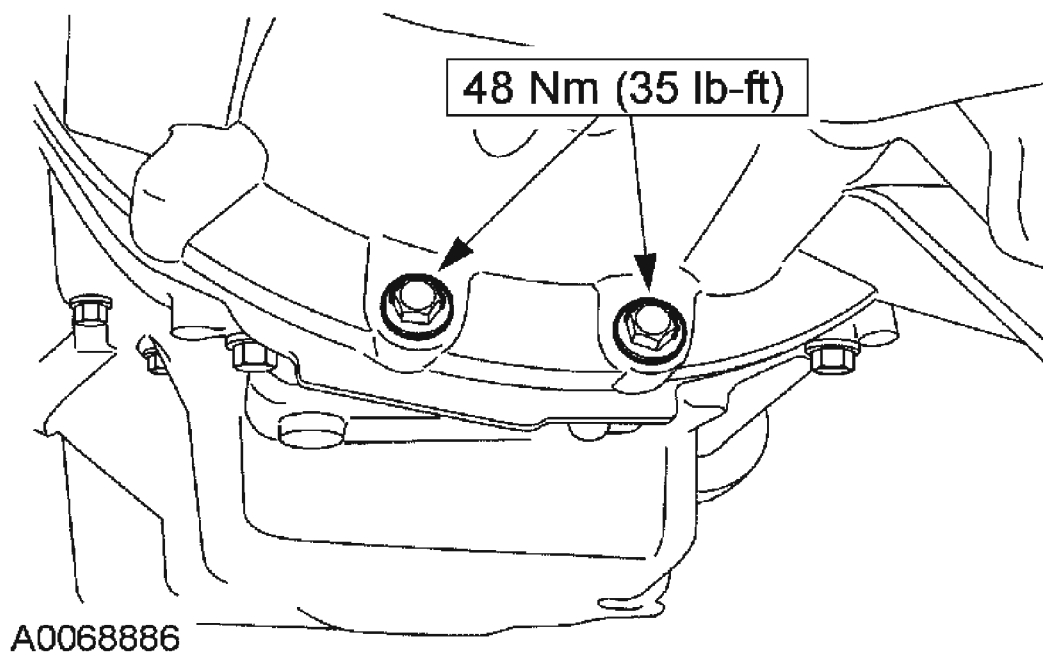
Installing 2 Bellhousing-To-Oil Pan Bolt
